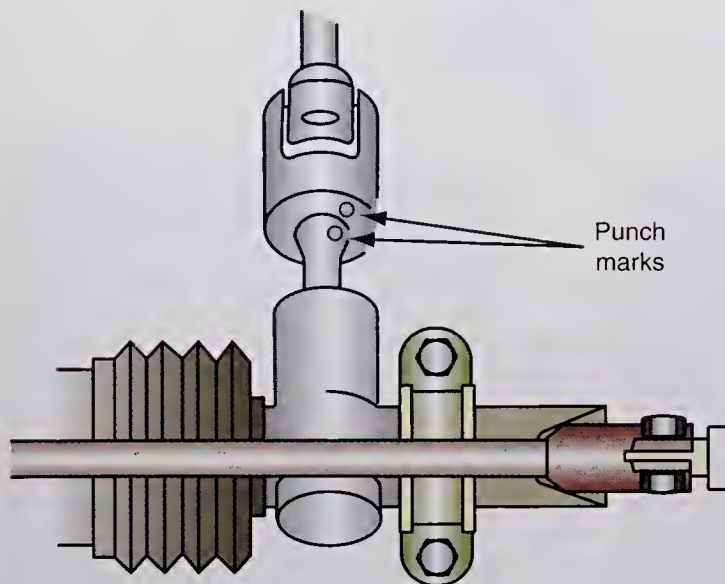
Punch marks on universal joint and pinion shaft.
